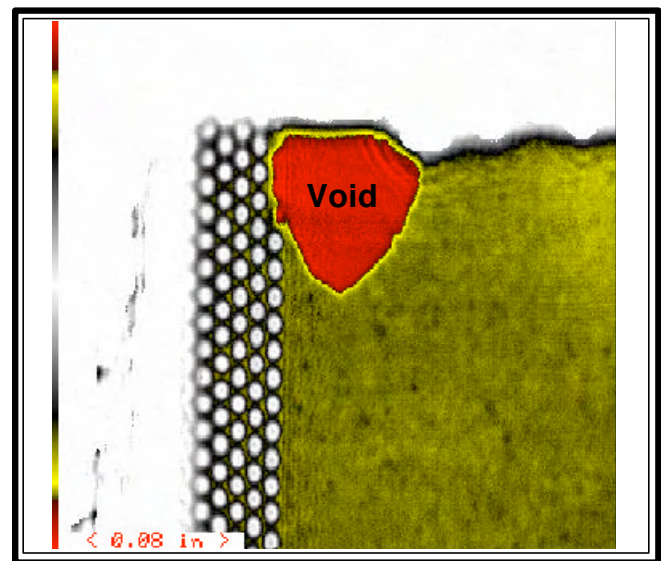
The bright area in the underfill is a void that caused the failure of several solder joints.
